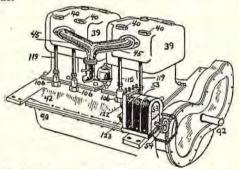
Inlet valves, inlet manifold, carburetor, magneto.
